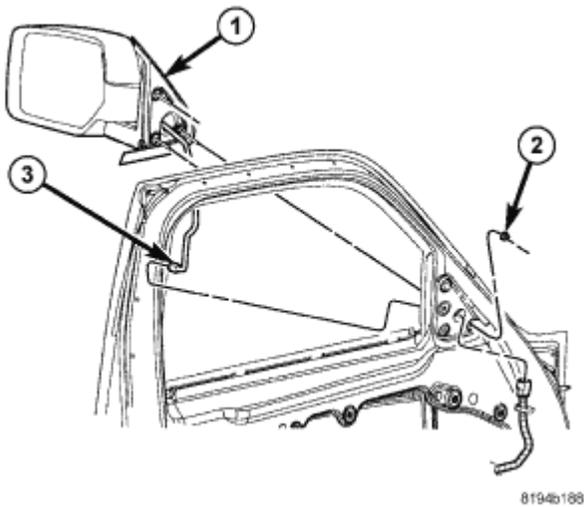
Mirror Assembly, Nuts & Electrical Connector
